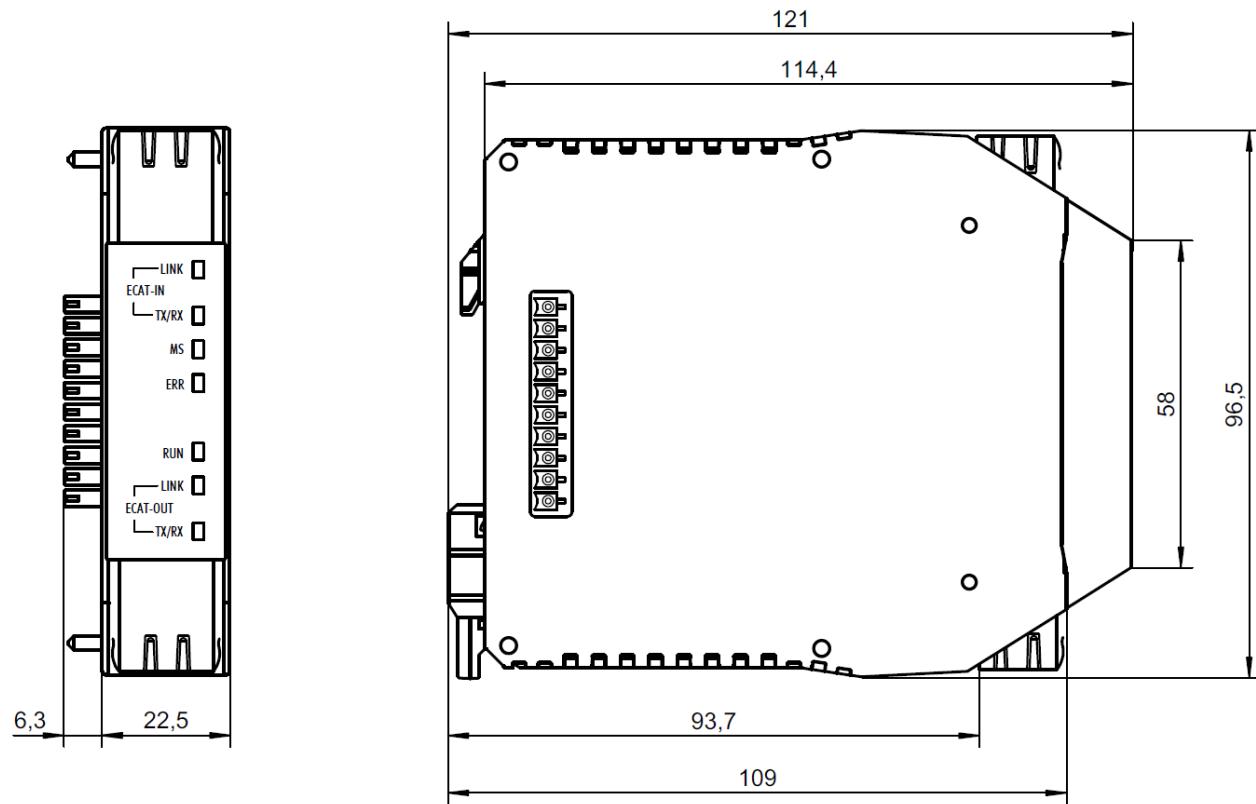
Dimensional drawing EtherCAT gateway (mm)
